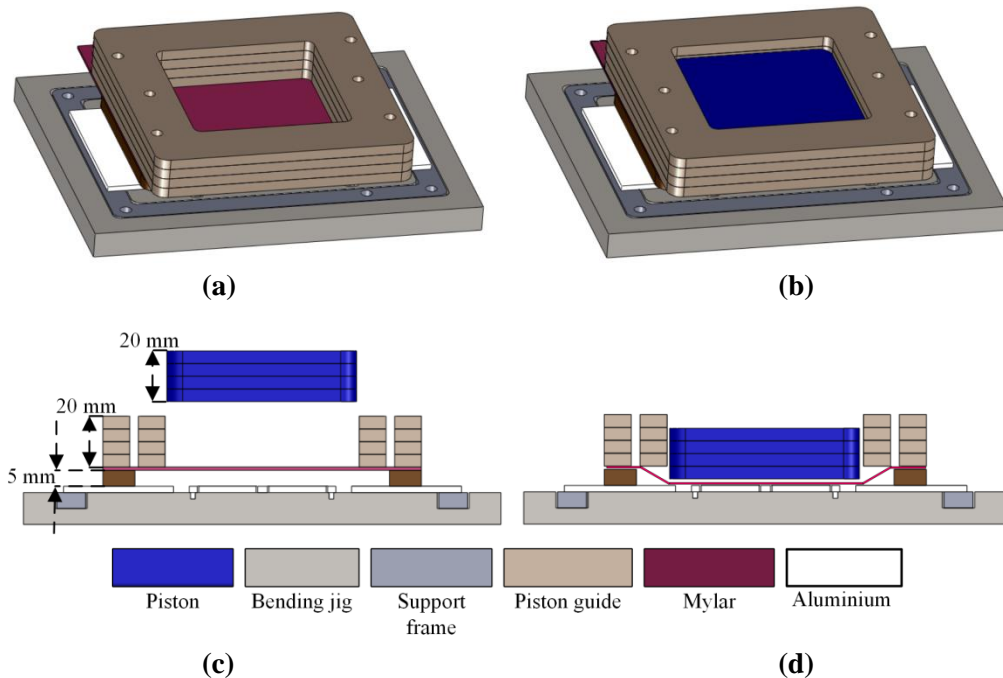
Mylar placement jigs and process. The thickness of aluminium plate and Mylar film are scaled up for visualization. (a) Placement of the piston guide and the Mylar attachment frame on the bending jig. (b) Piston is guided and pushed through the guide jig to stretch Mylar and attach to the aluminium plate. (c) and (d) Cross-section of the processes.
